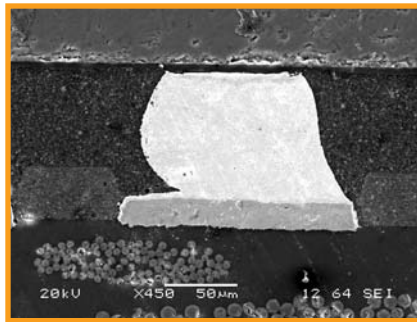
Cross section picture of a poor solder joint, Flux I.
